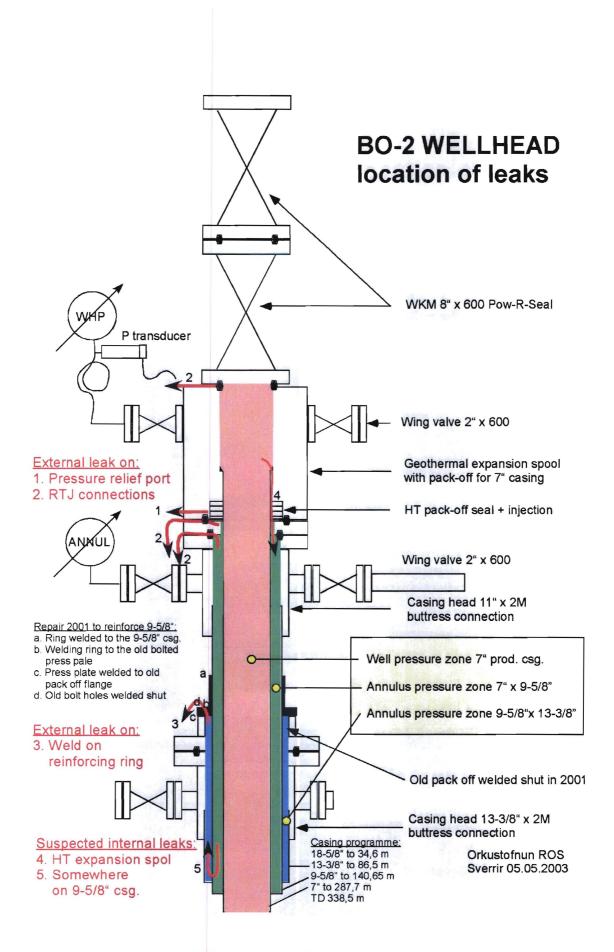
Drawing of BO-2 wellhead showing location of possible leaks and pressure zones.
